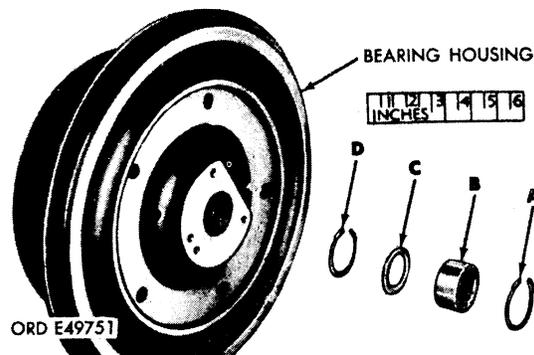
REMOVING OR INSTALLING TURBINE END SLEEVE BEARING, THRUST WASHER, AND RETAINING RINGS - TURBOCHARGERS 10912638 AND 53591-C-139552.
